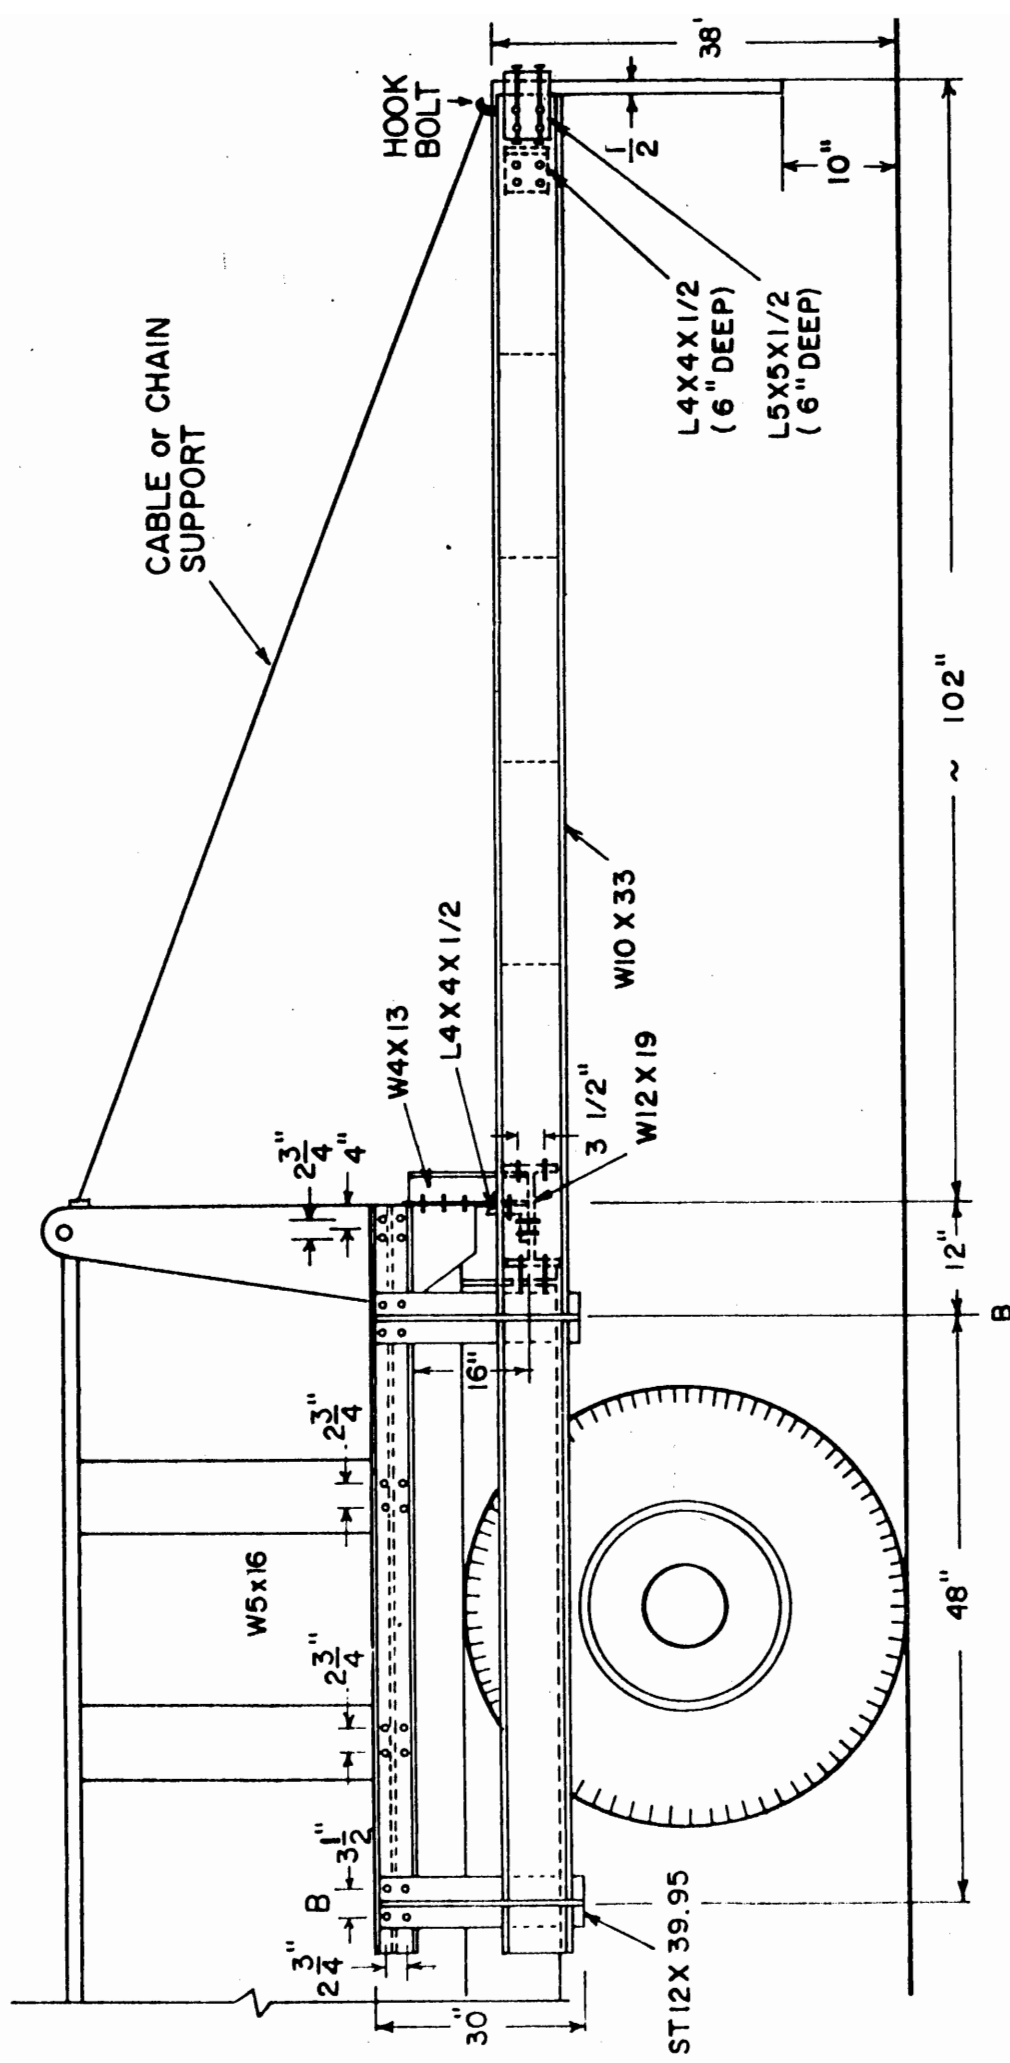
SIDE VIEW ( 3/4" HSB FOR FIXTURE CONNECTIONS )
